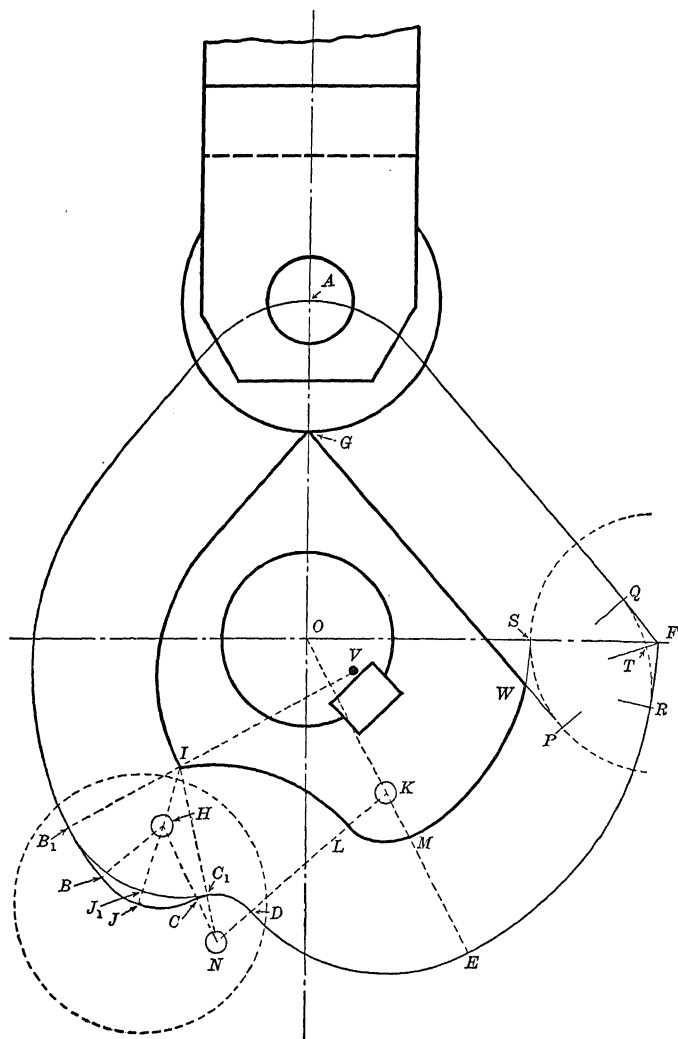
LIMITING SIZE OF FOLLOWER ROLLER
